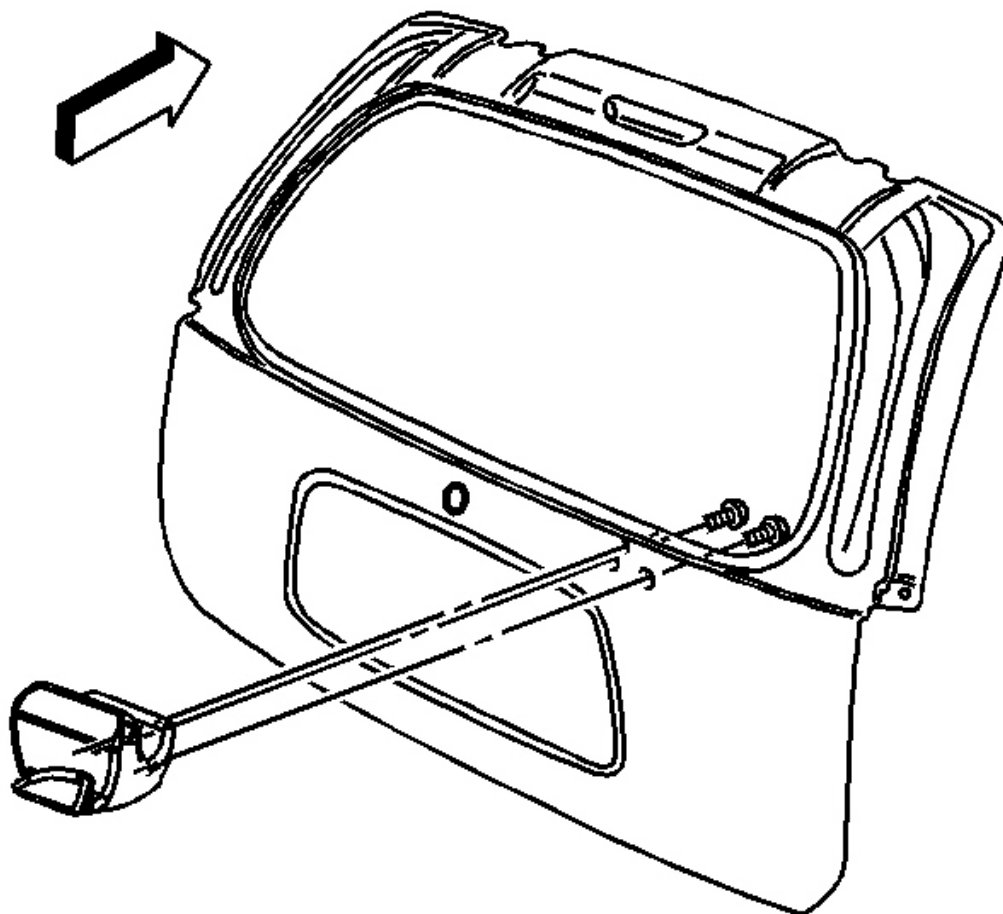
View Of Wiper Arm Park Ramp & Bolts
